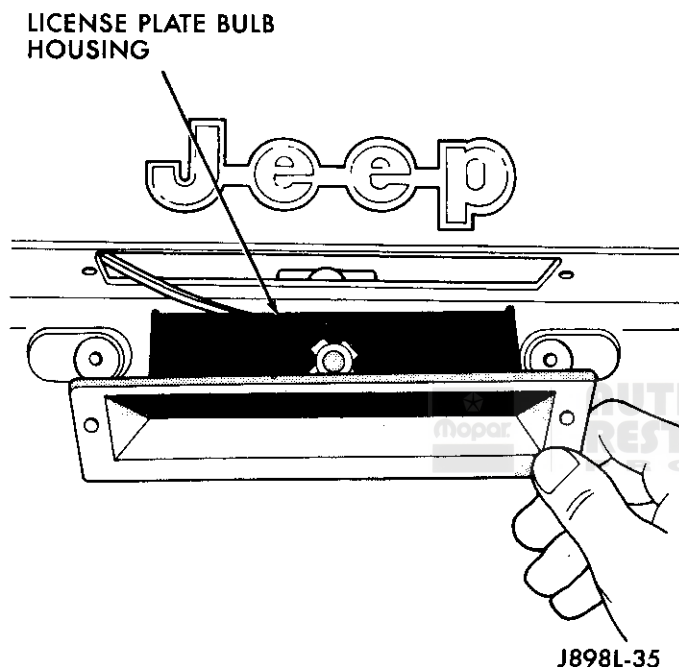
License Plate Bulb and Housing Without Swing Out Spare Tire
